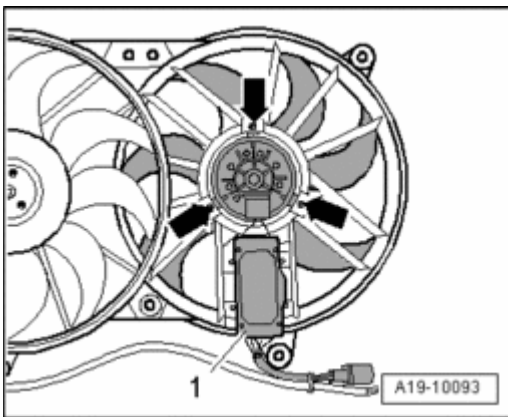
Removing Bolts, Unclipping Coolant Fan Control (FC) Control Module 2 J671 And Removing Coolant Fan And Coolant Fan Control Module
